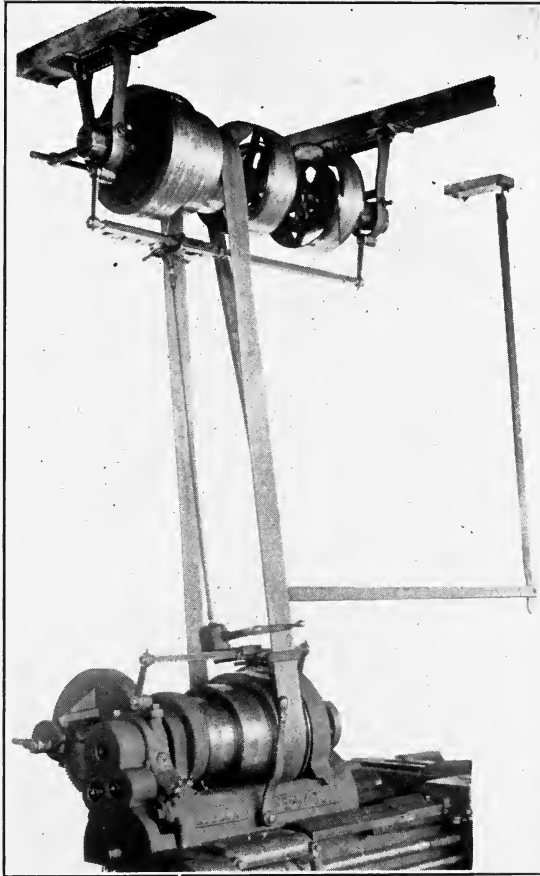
Mechanical belt shifter for cone pulley belts.
